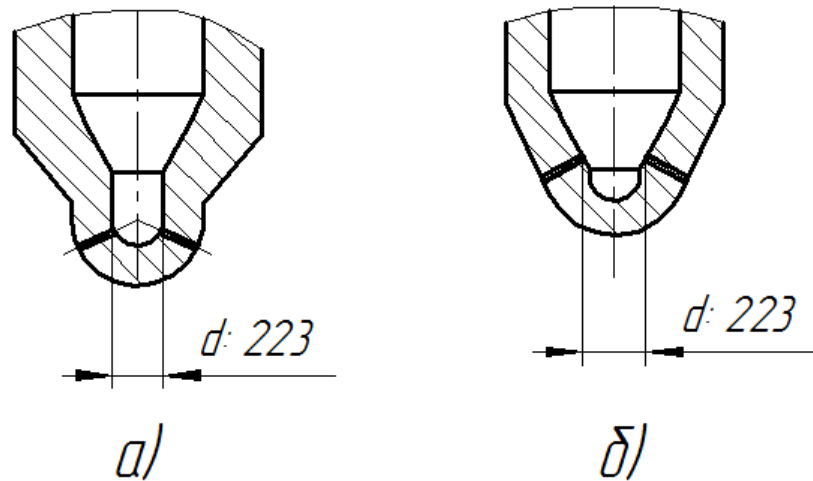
Sprayholes: a) with blind hole; b) sac-less
